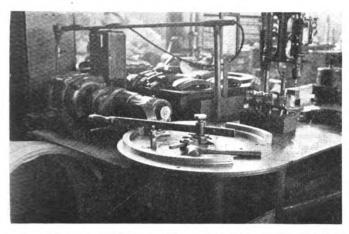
A close-up of the power saw showing the arrangement of the selector bar and stop pins for sawing rings accurately into varying numbers of segments, as desired
